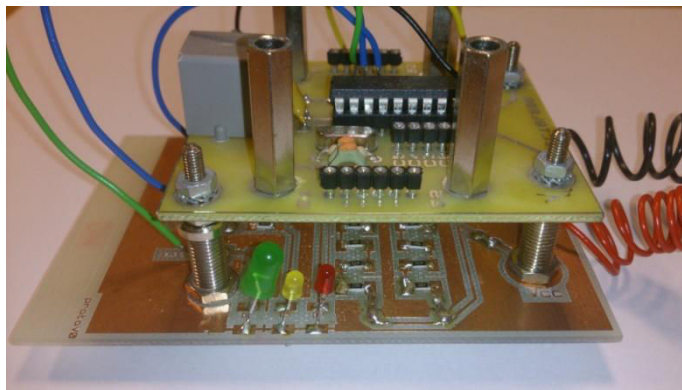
Picture of the assembly (sensor + microcontroller board).
